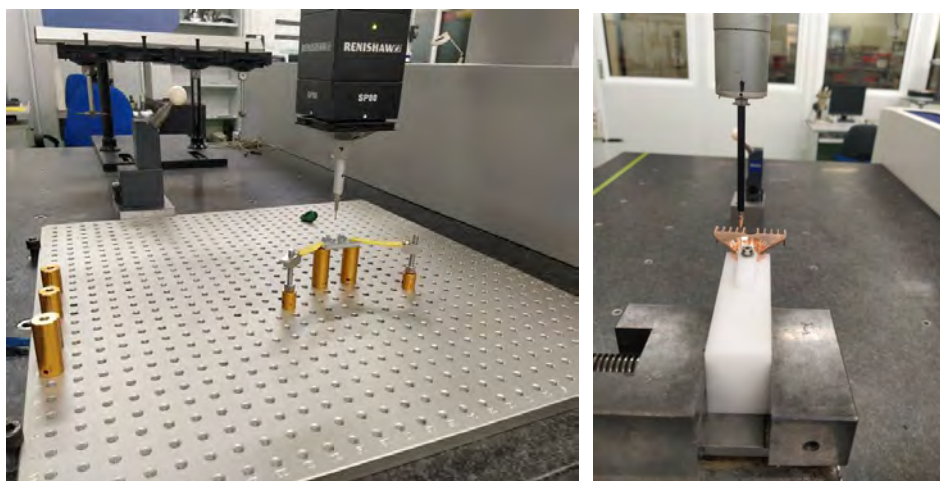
CMM based Dimensional Inspection of In vessel Support Components – Diagnostic Programme.
